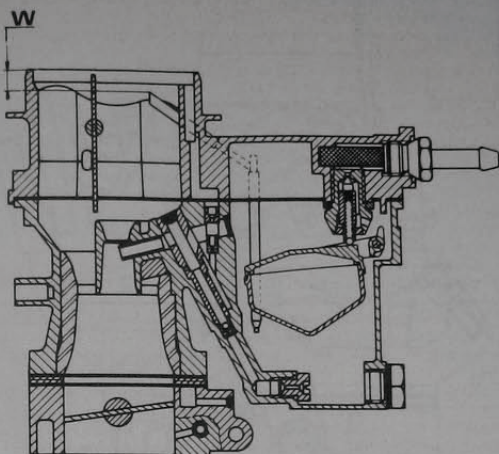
Auxiliary jet tube setting – Zenith carburettor (Sec 17)
